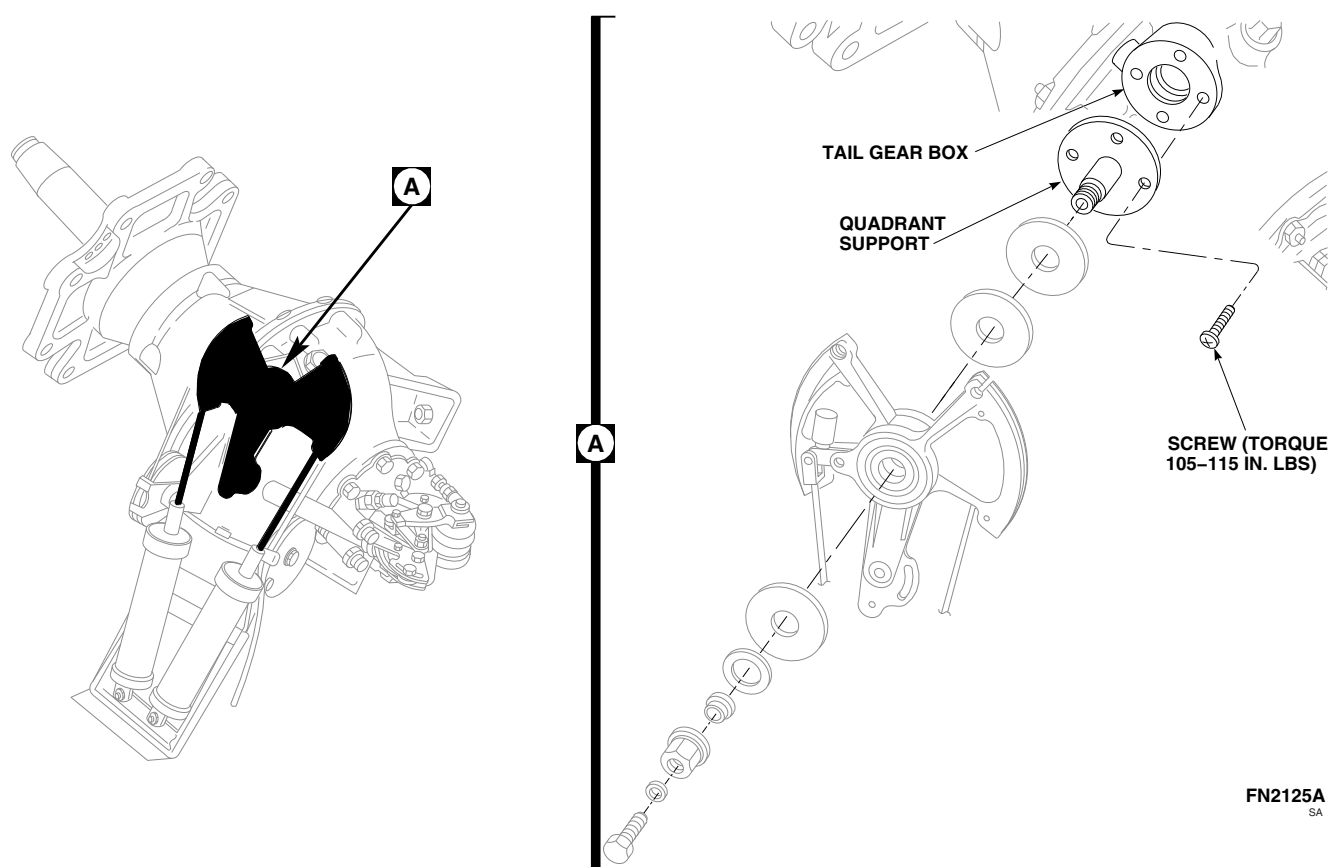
REPLACE TAIL ROTOR QUADRANT SUPPORT
